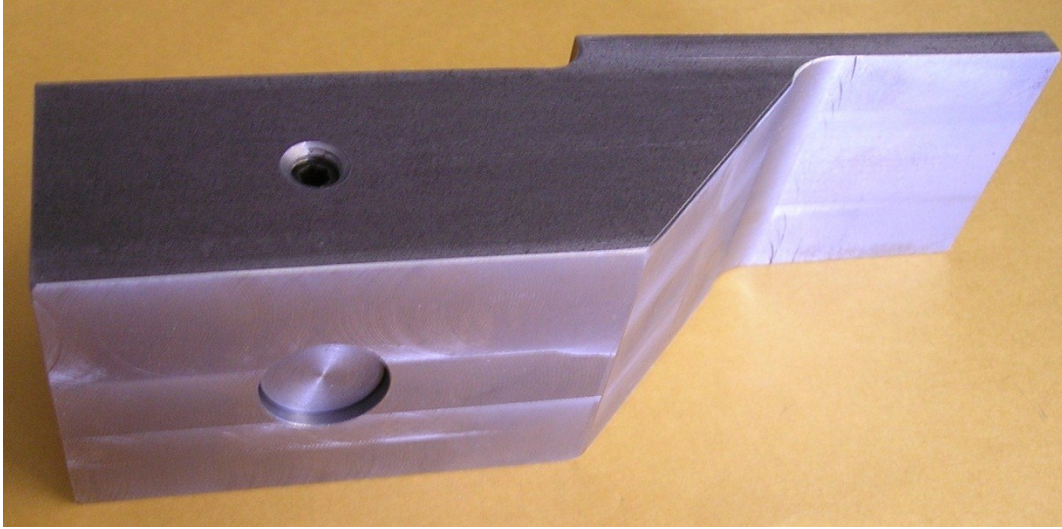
(b): Back view of back loading fixture showing pin and set screw which bears against the pin
